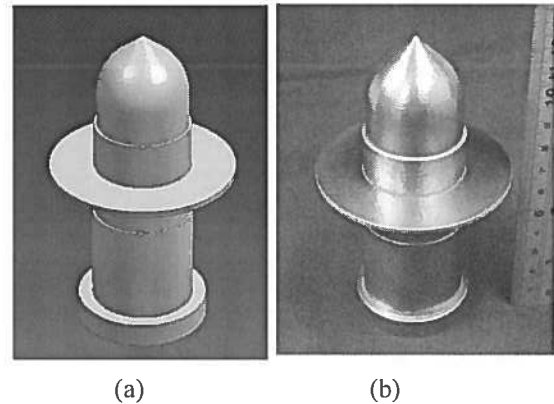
LC IN-625 demonstration piece with conical top, (a) CAD drawing and (b) LC part.
